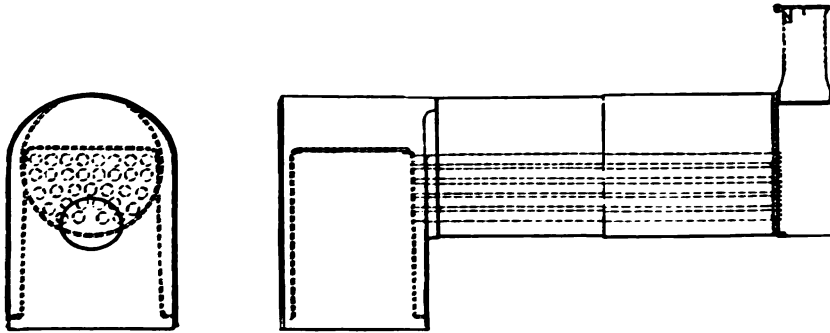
Ransome's Portable Steam Engine: Elevation and Plan. Scale $1/32d$.
